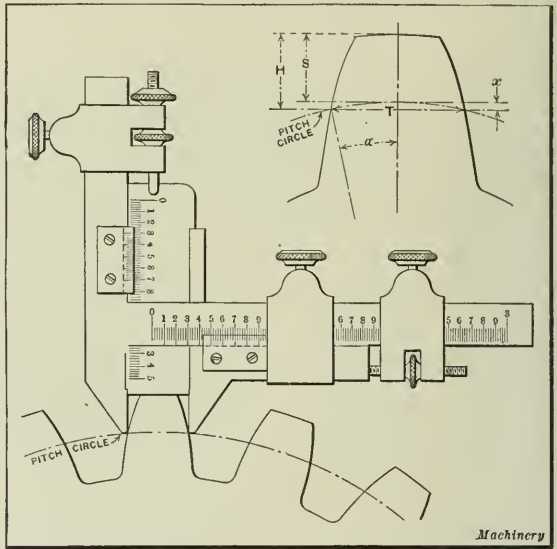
Diagram illustrating Calculation Necessary to determine Thickness of Tooth with Caliper shown in Fig. 6
